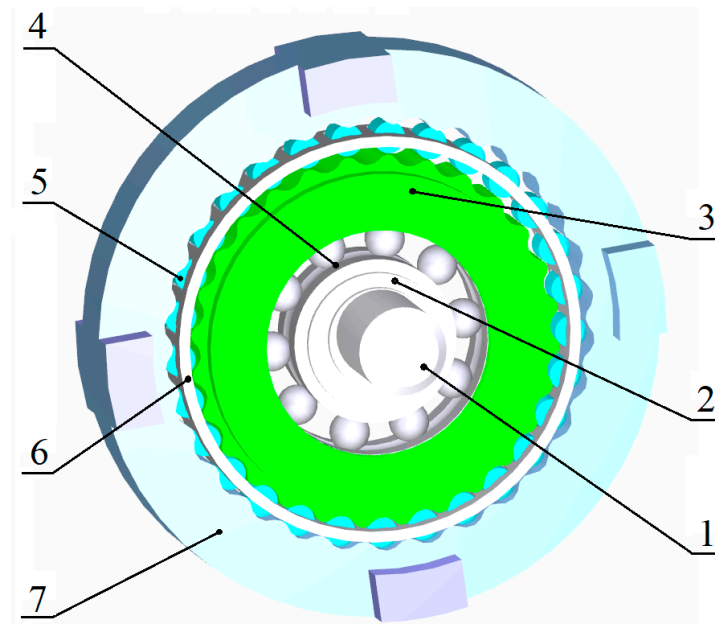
Scheme of a gear with intermediate rolling elements and a free cage: 1—input shaft; 2—eccentric disc; 3—cycloidal wheel-cam; 4—rolling bearing; 5—intermediate rolling elements; 6—cage; 7—cycloidal wheel-crown.
